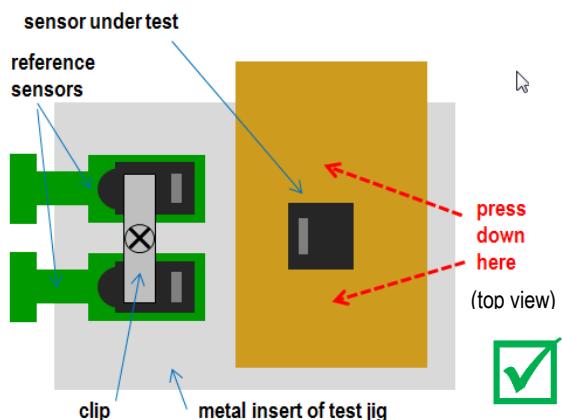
Good example of PCB test jig with clip holding down two reference sensors to ensure good thermal coupling to the metal insert. The reference sensors and the sensor under test are placed at minimum distance to each other.
